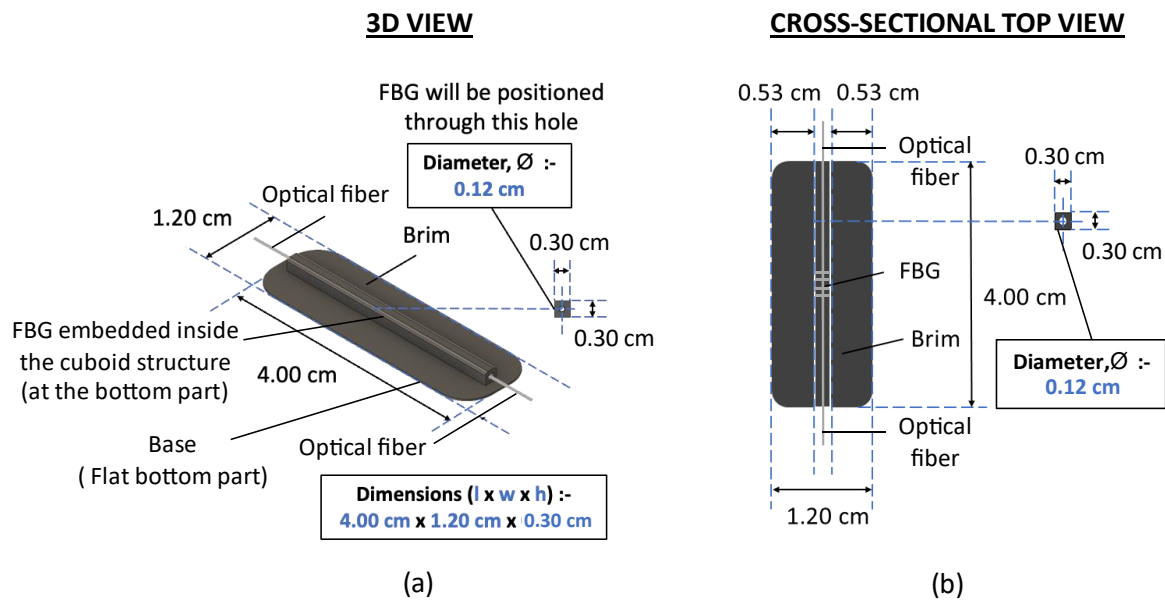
Illustration of the sensor design, showing the (a) 3D view and (b) cross-sectional top view of the embedded FBG-based strain sensor with dimensions.
